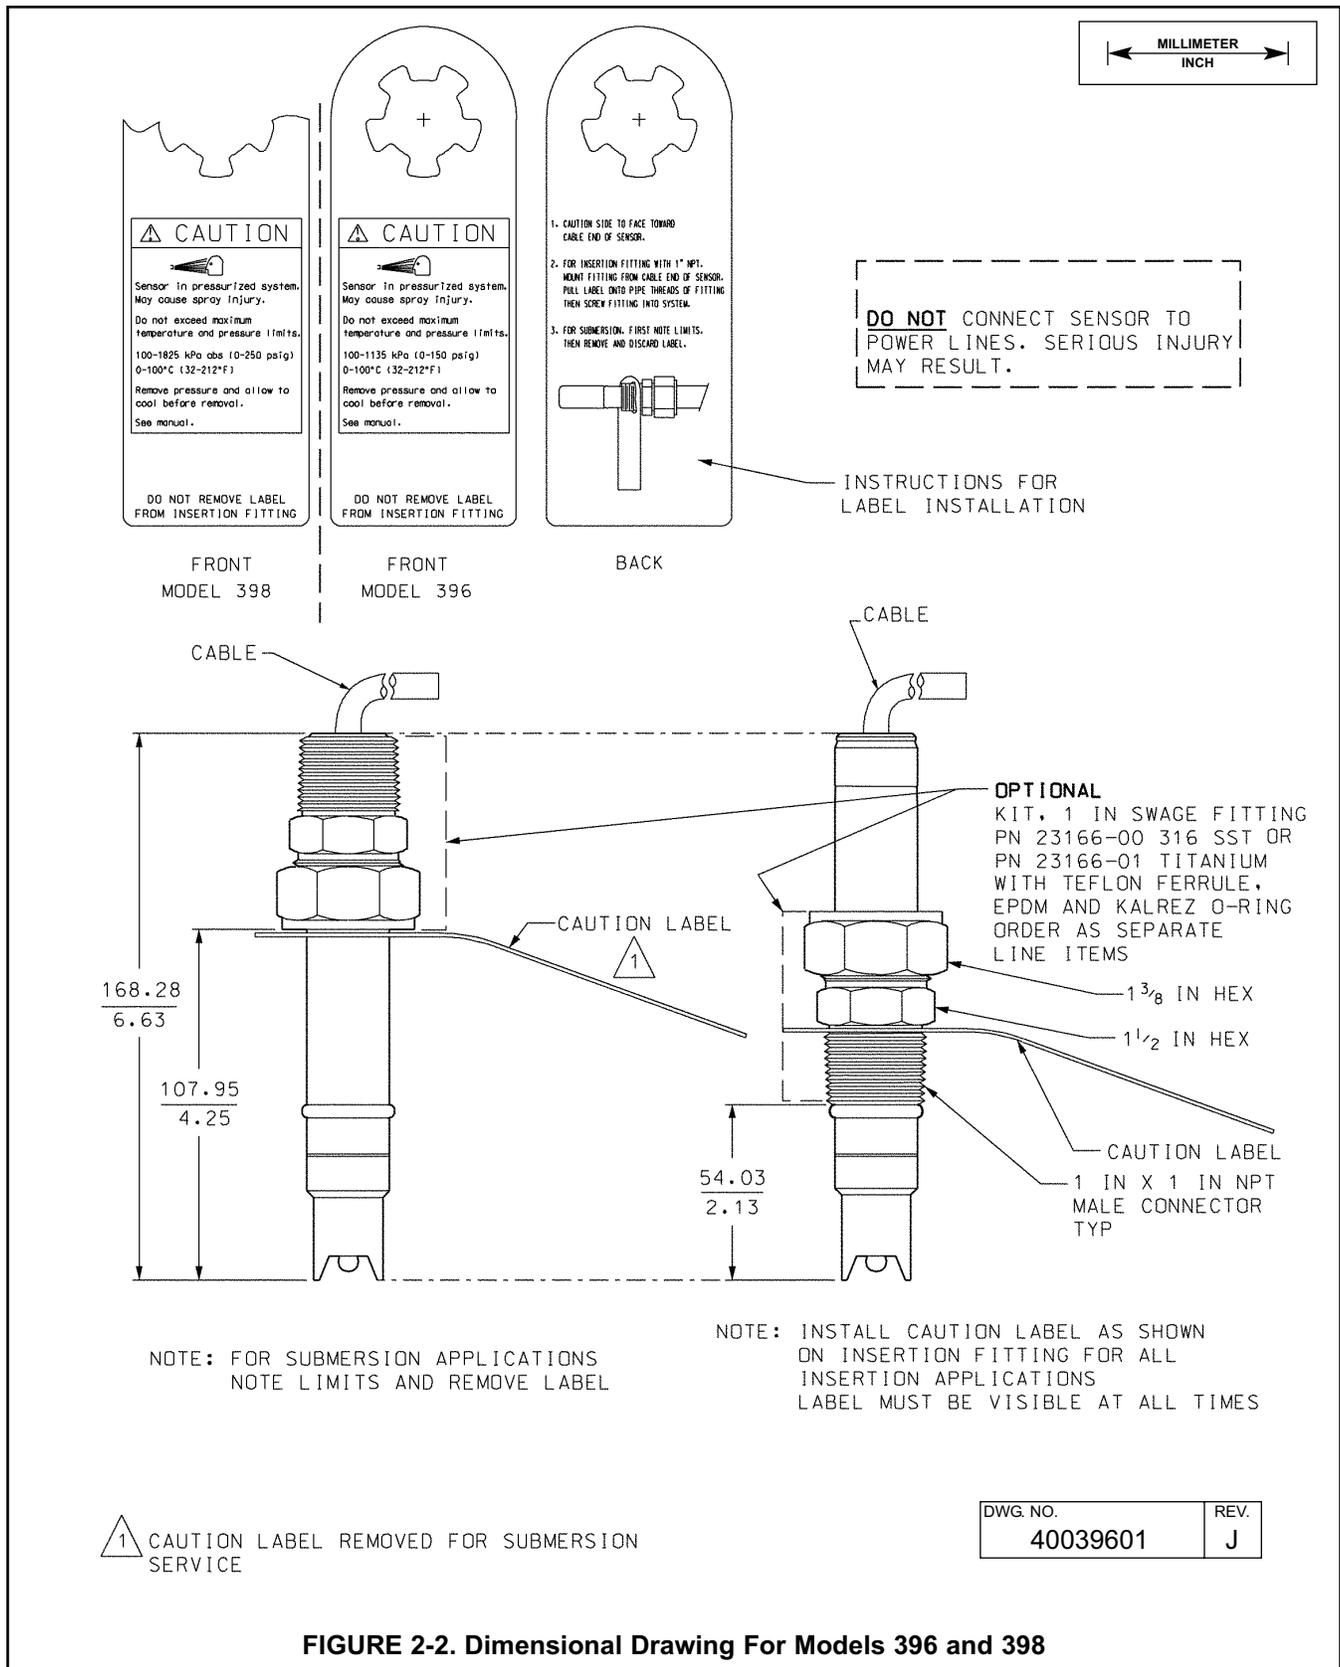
Dimensional Drawing For Models 396 and 398
